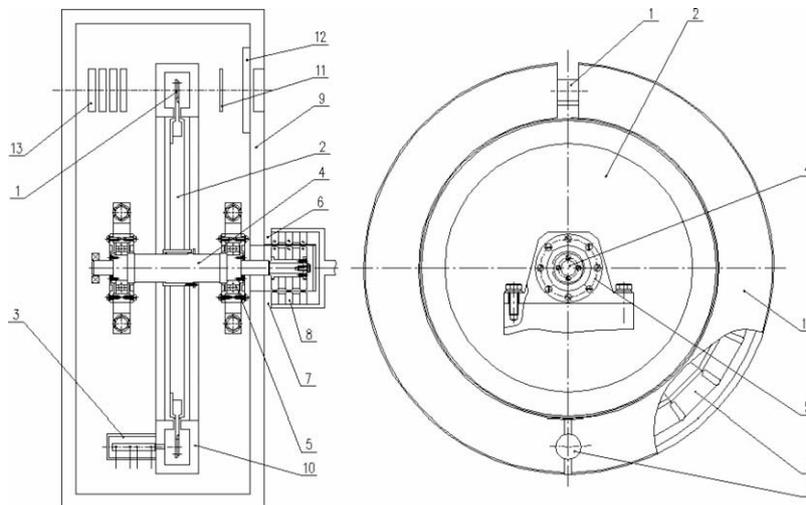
Rotating converter assembly. (1) – converter material, (2) – stainless-steel disk, (3) – bolometer, (4) – rotating shaft, (5) – bearings, (6) – vibration pick-ups, (7) – rotation magnetic sensor, (8) – rotation system, (9) – vacuum chamber, (10) – cooling channel, (11) – pick-up, (12) – output window, (13) – beam collimator.
